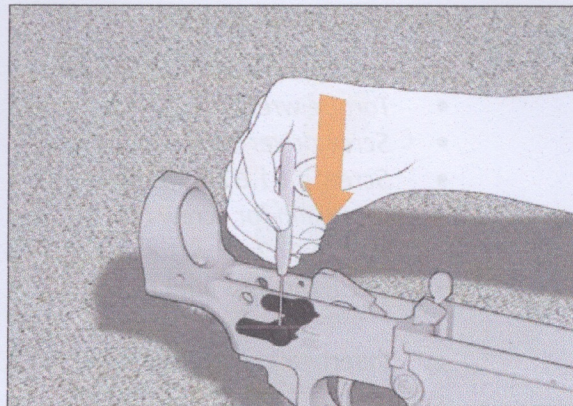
Driving in the clamping sleeve for the right-hand safety lever.
